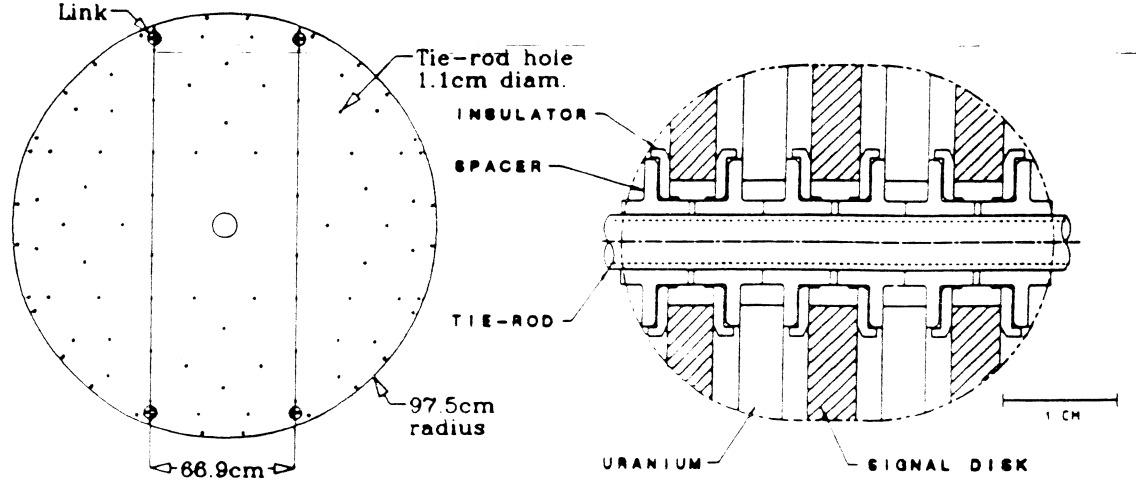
(a) An EM3 uranium disk assembly. (b) A section of a tie-rod assembly.
